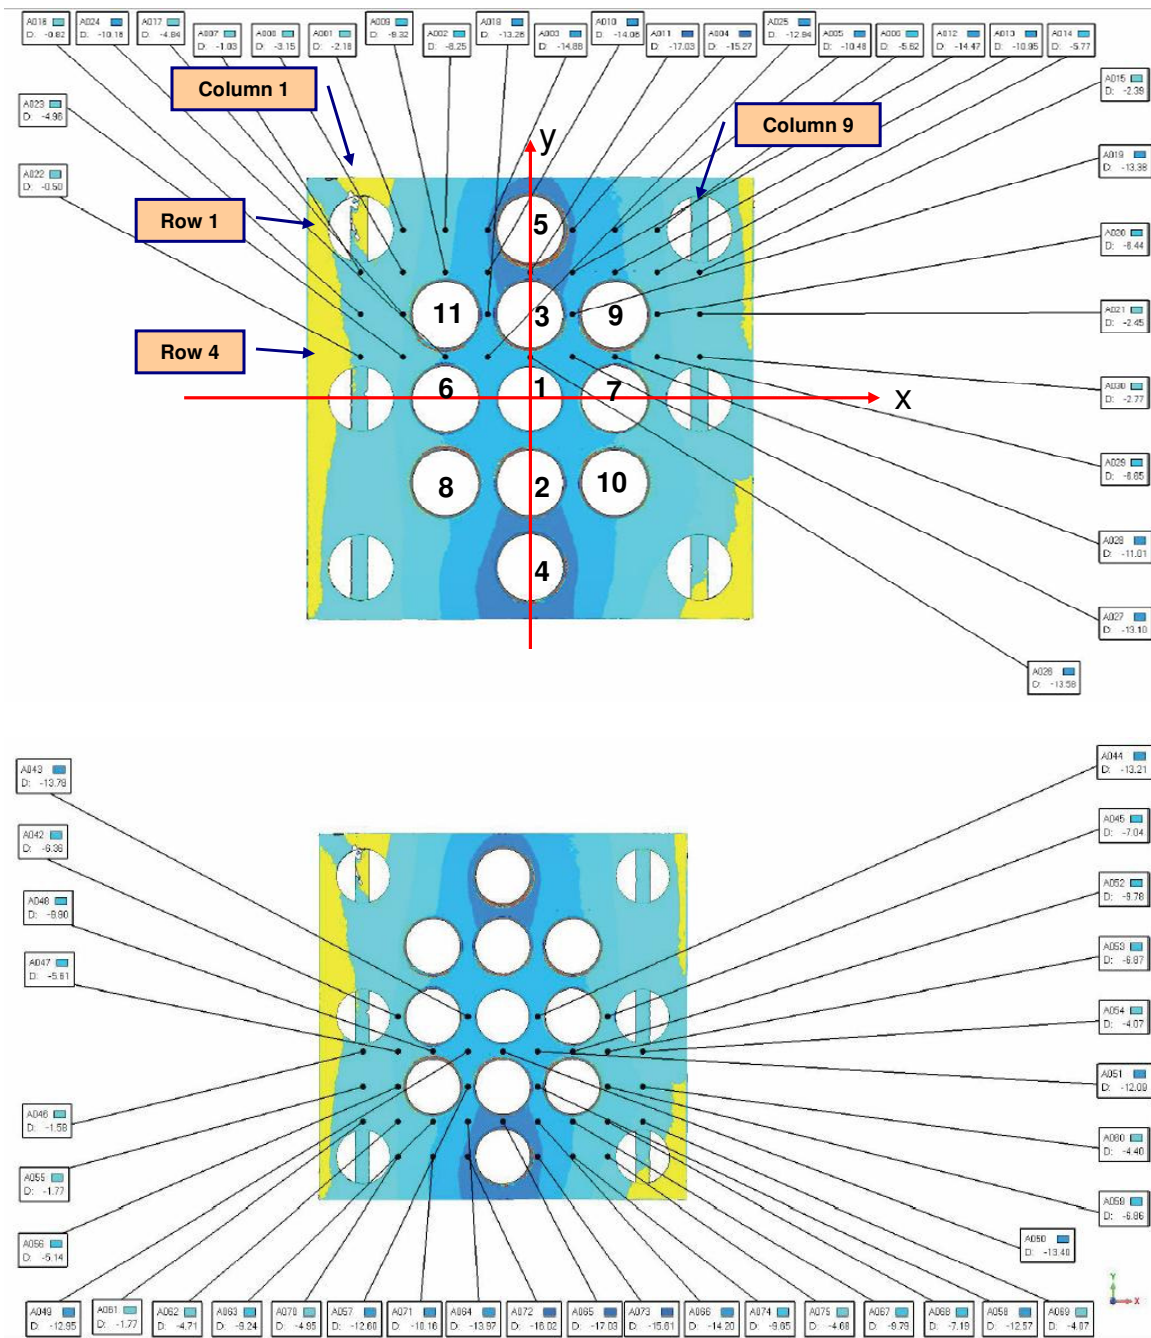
Welding Distortion Data Matrix of Multi-nozzle Weld Mockup
